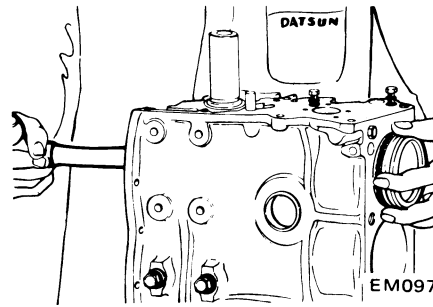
Removing Piston and Connecting Rod Assembly
